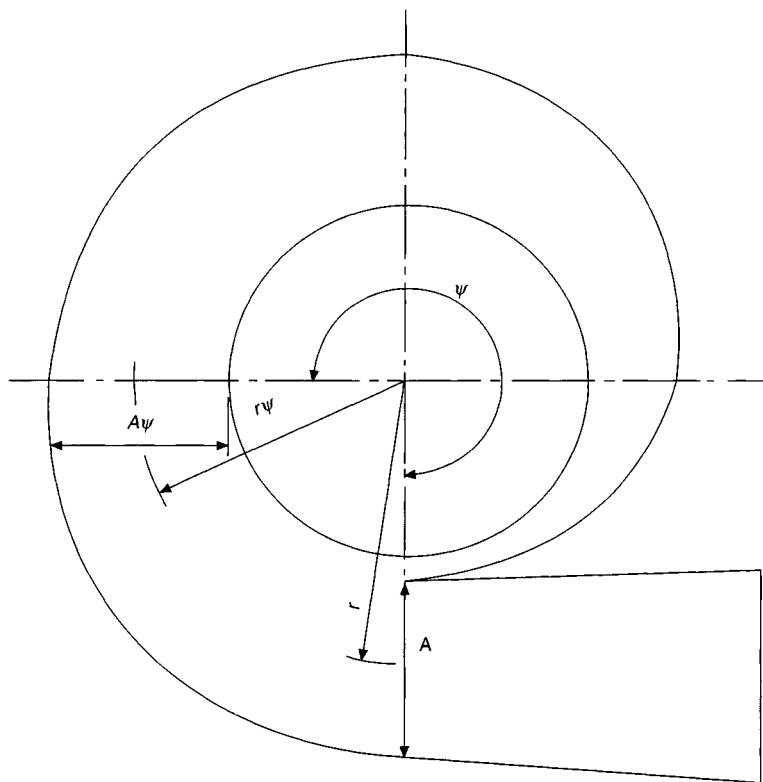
Geometric specification of a vaneless radial turbine housing (volute)
